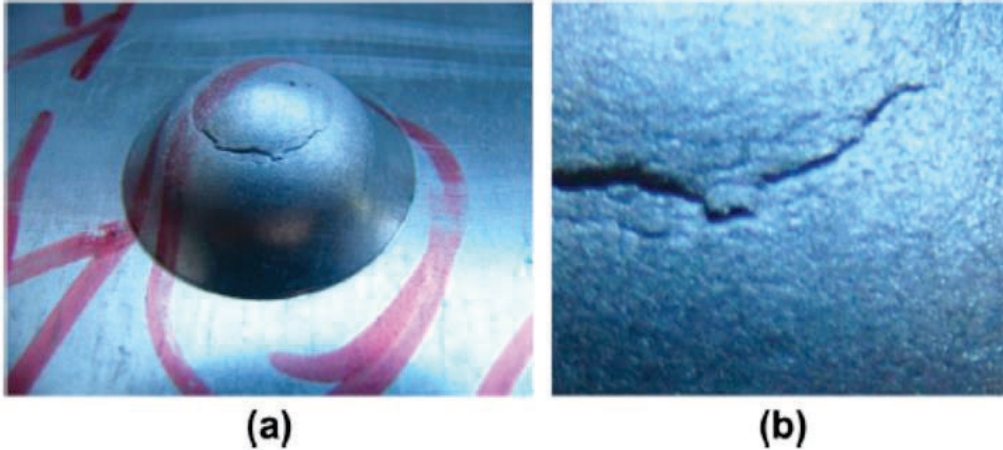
(a) Image showing Erichsen deep drawing test of steel 2 sheet. Zinc coating is cracked and the layer is peeled off the surface. (b) High magnification image show detail of crack without contraction confirms worse workability of steel 2.
